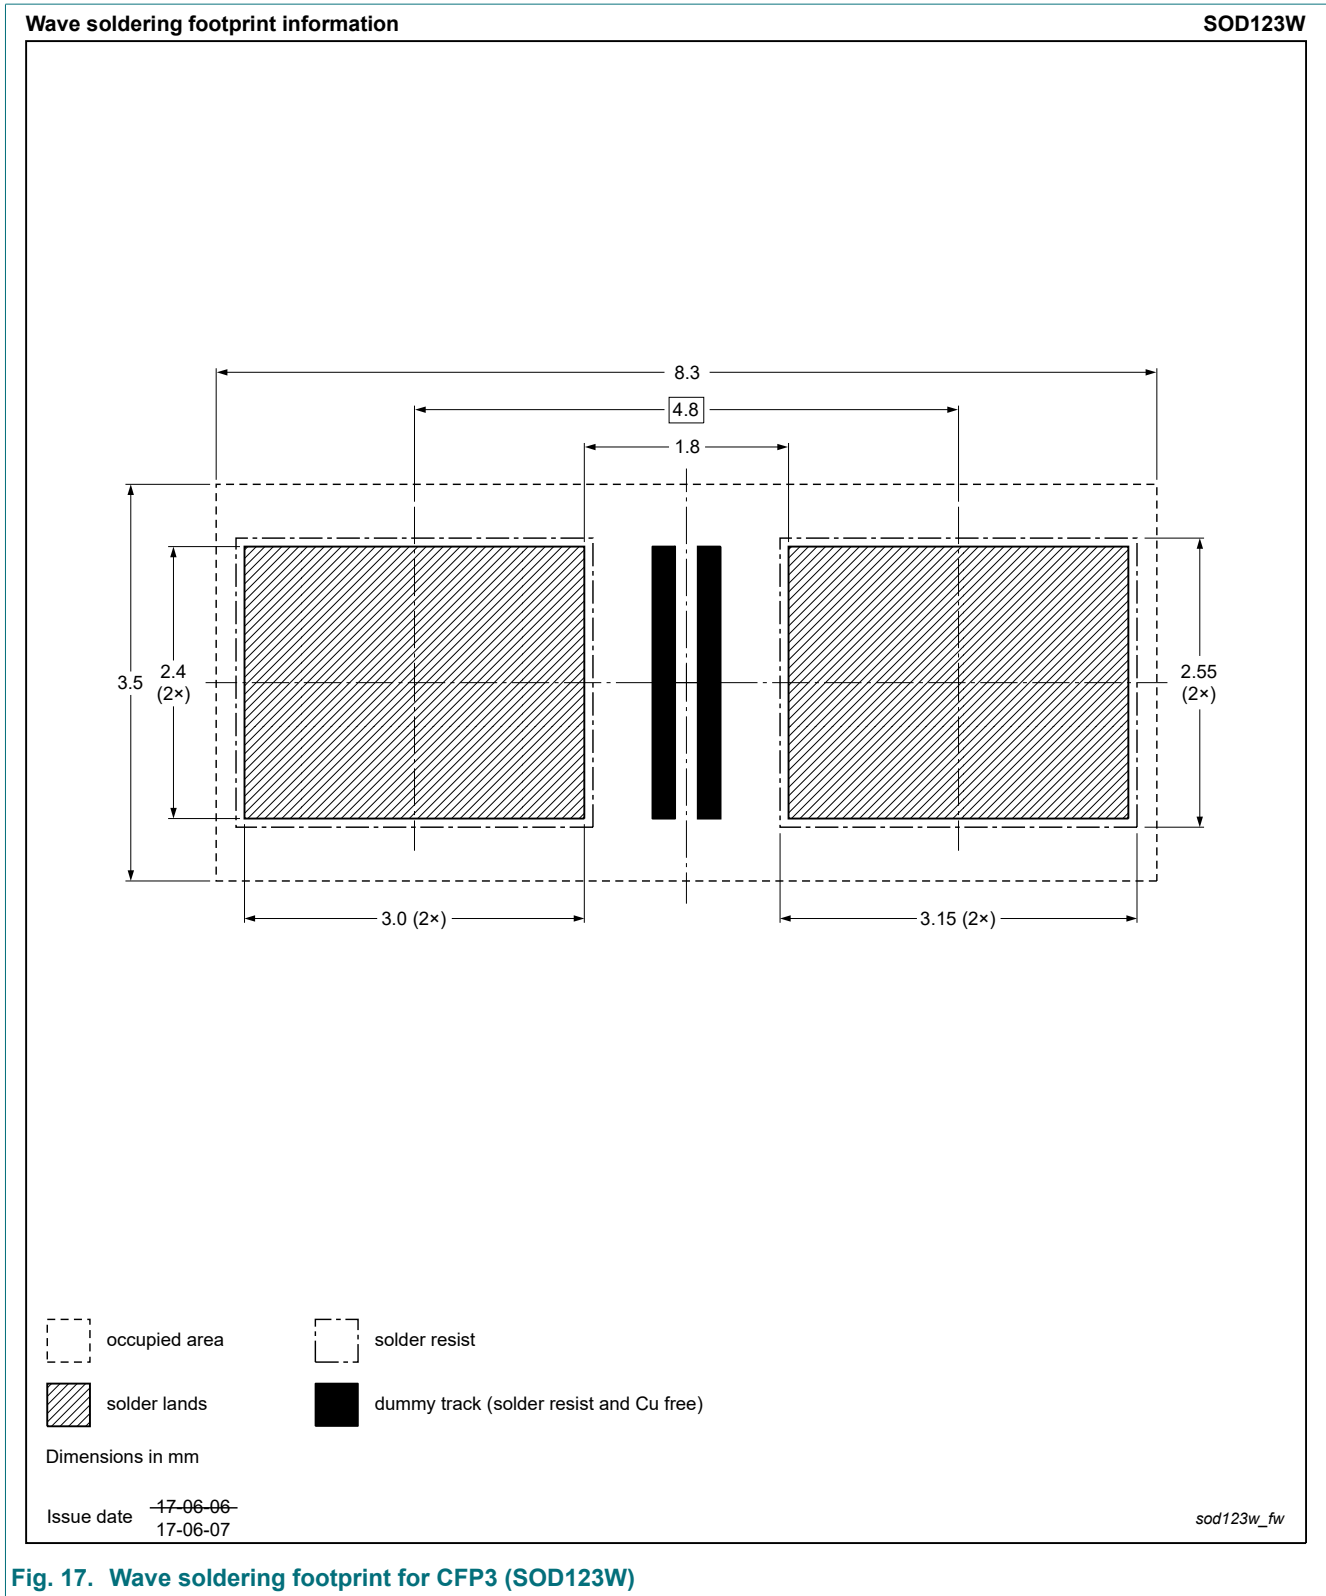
Wave soldering footprint for CFP3 (SOD123W)
